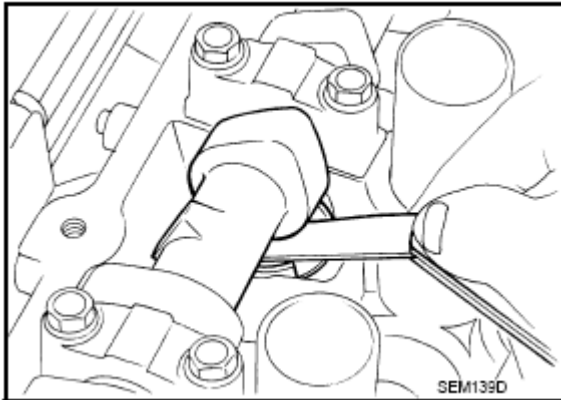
Measuring Clearance Between Valve Lifter And Camshaft Using Feeler Gauge
